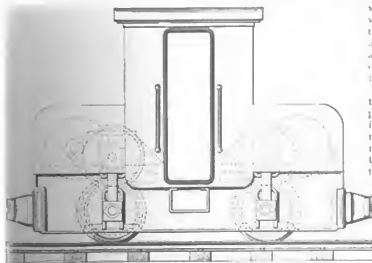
MOUNTING LARGE MOTORS ON A NARROW GAGE
